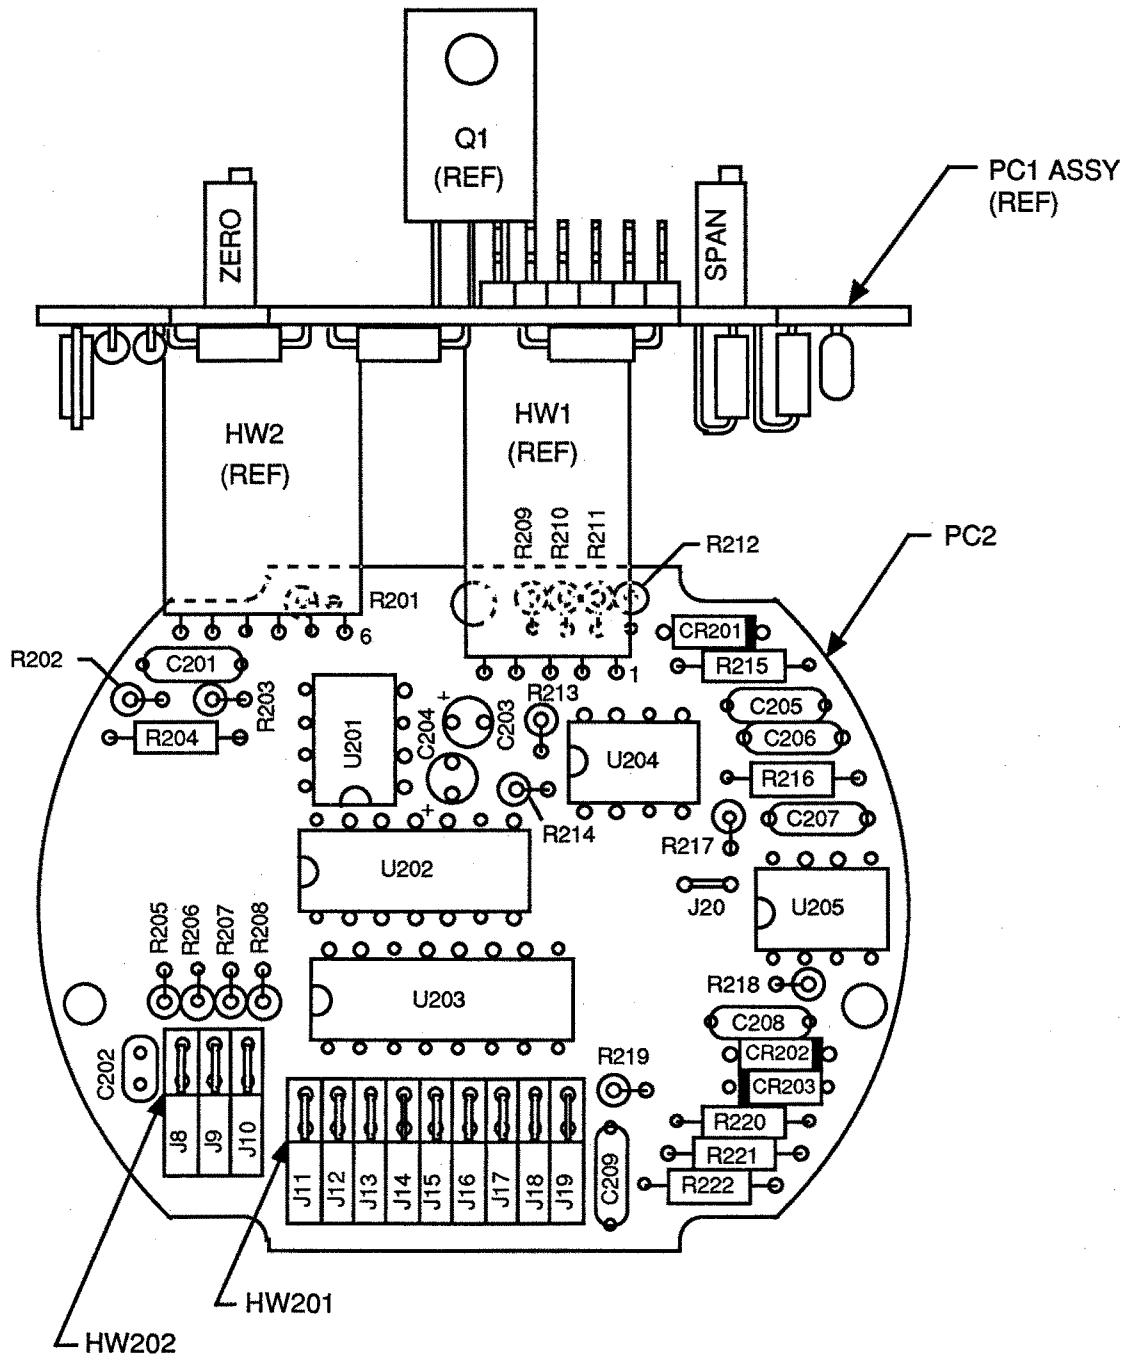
Printed Circuit Board Assembly 2 for the EP-FDX Transmitter with HP Housing
